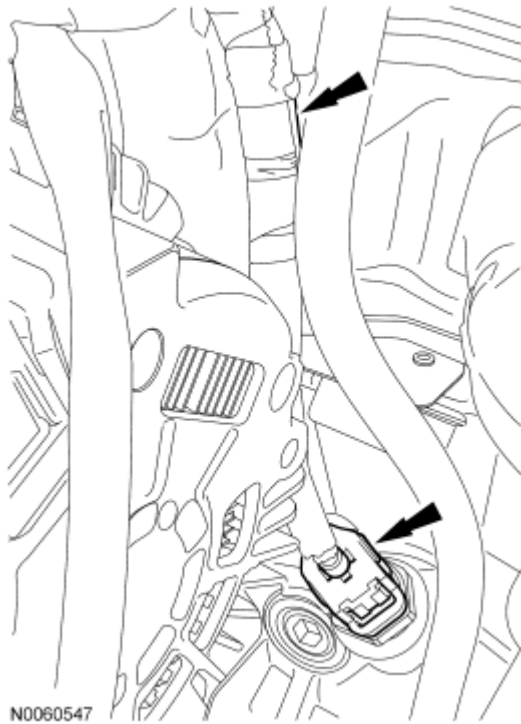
Identifying Engine Oil Pressure (EOP) Switch Electrical Connector & Wiring Harness Retainer
